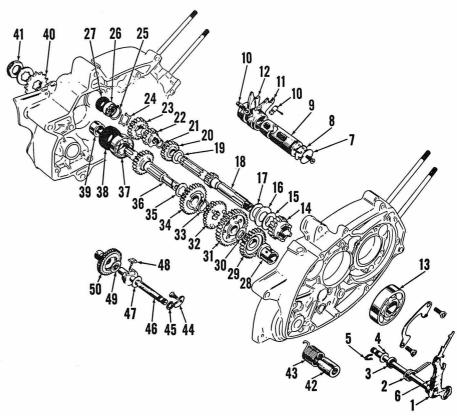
Exploded view of the transmission and kick starter assembly.
